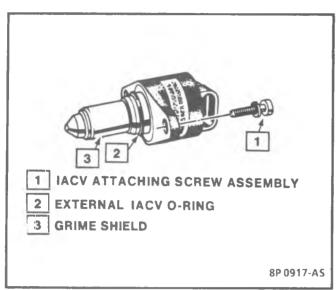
Flange-Mount IAC Valve - TBI 700
